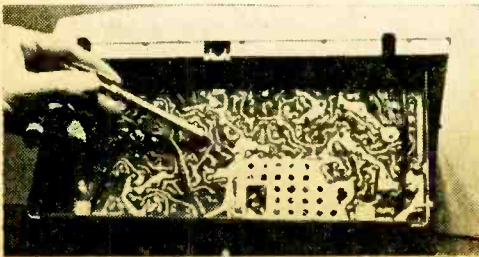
Last but not least in the stable of portable TV troubles is the printed circuit board. Check it for cracks and cold solder joints in the area of the defective circuit, especially around heavy components.
